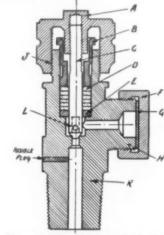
Another packed type Arctic cylinder valve. Parts are: A-control handle; B-packing nut; C-valve stem; D-packing; E-packing collar; F-protecting cap; G-fibre gasket; Hnozzle; J-V thread right hand; K-valve body; L-pin key; Mfuse plug; melts at 158° F.
